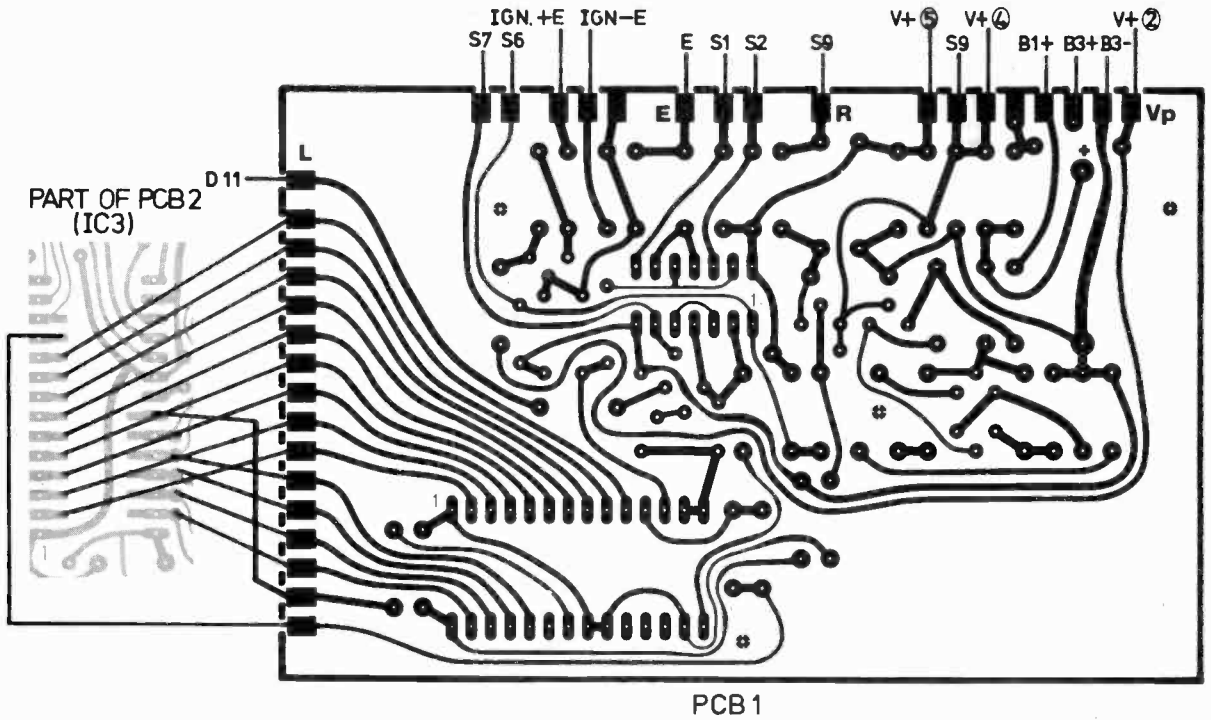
PCB1 printed circuit master and connecting details. Note the wiring on the left edge is soldered direct to IC3 pins on board PCB2
